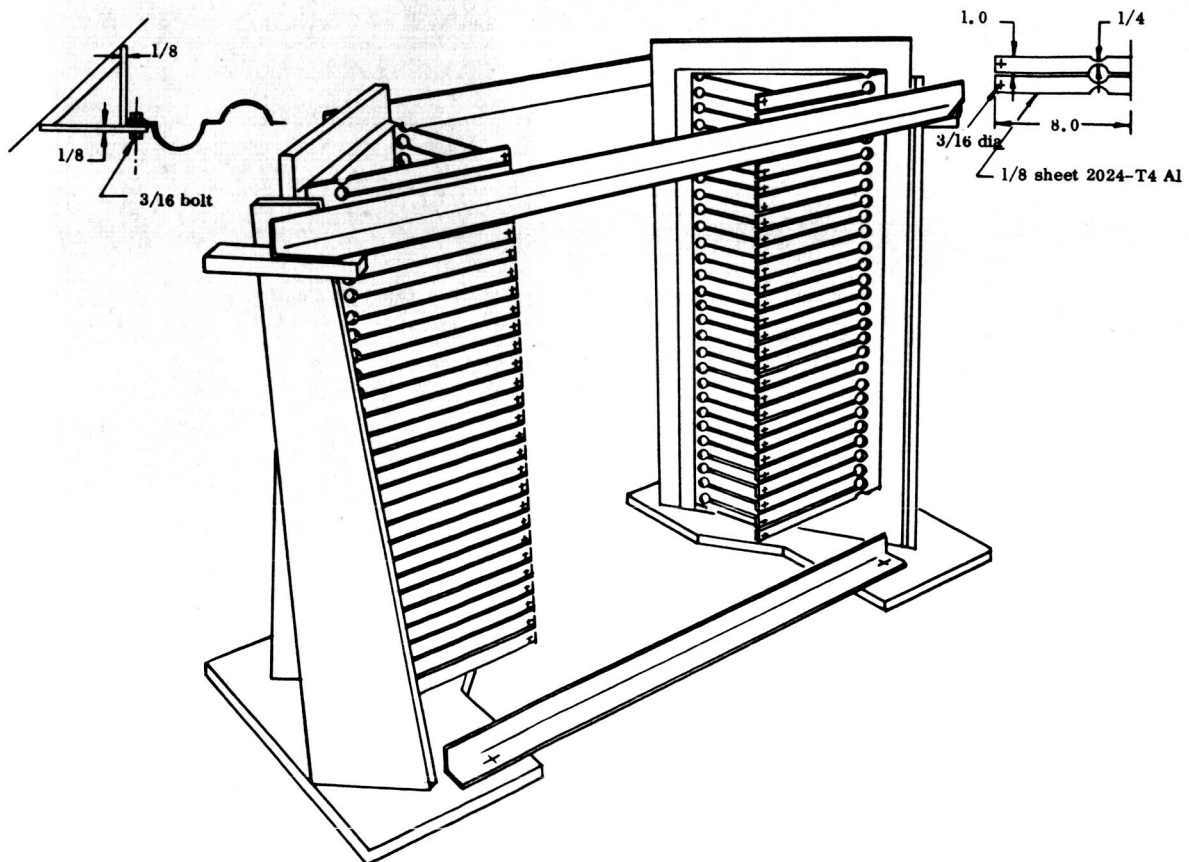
SERRATED EDGE SUPPORT FIXTURE-COMPRESSION PANELS
